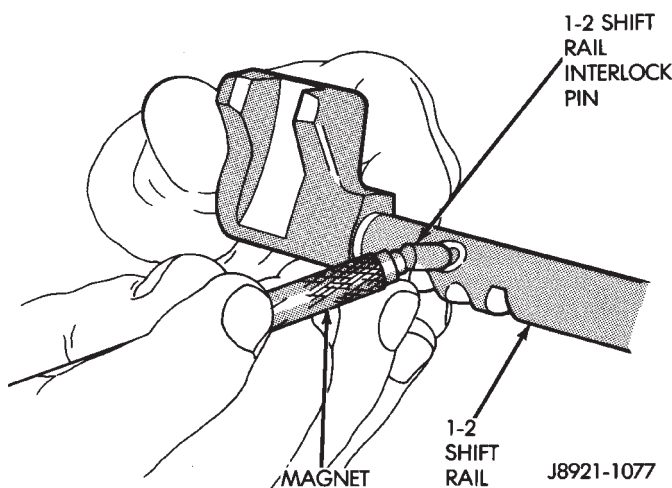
Removing 1-2 Shift Rail Interlock Pin
